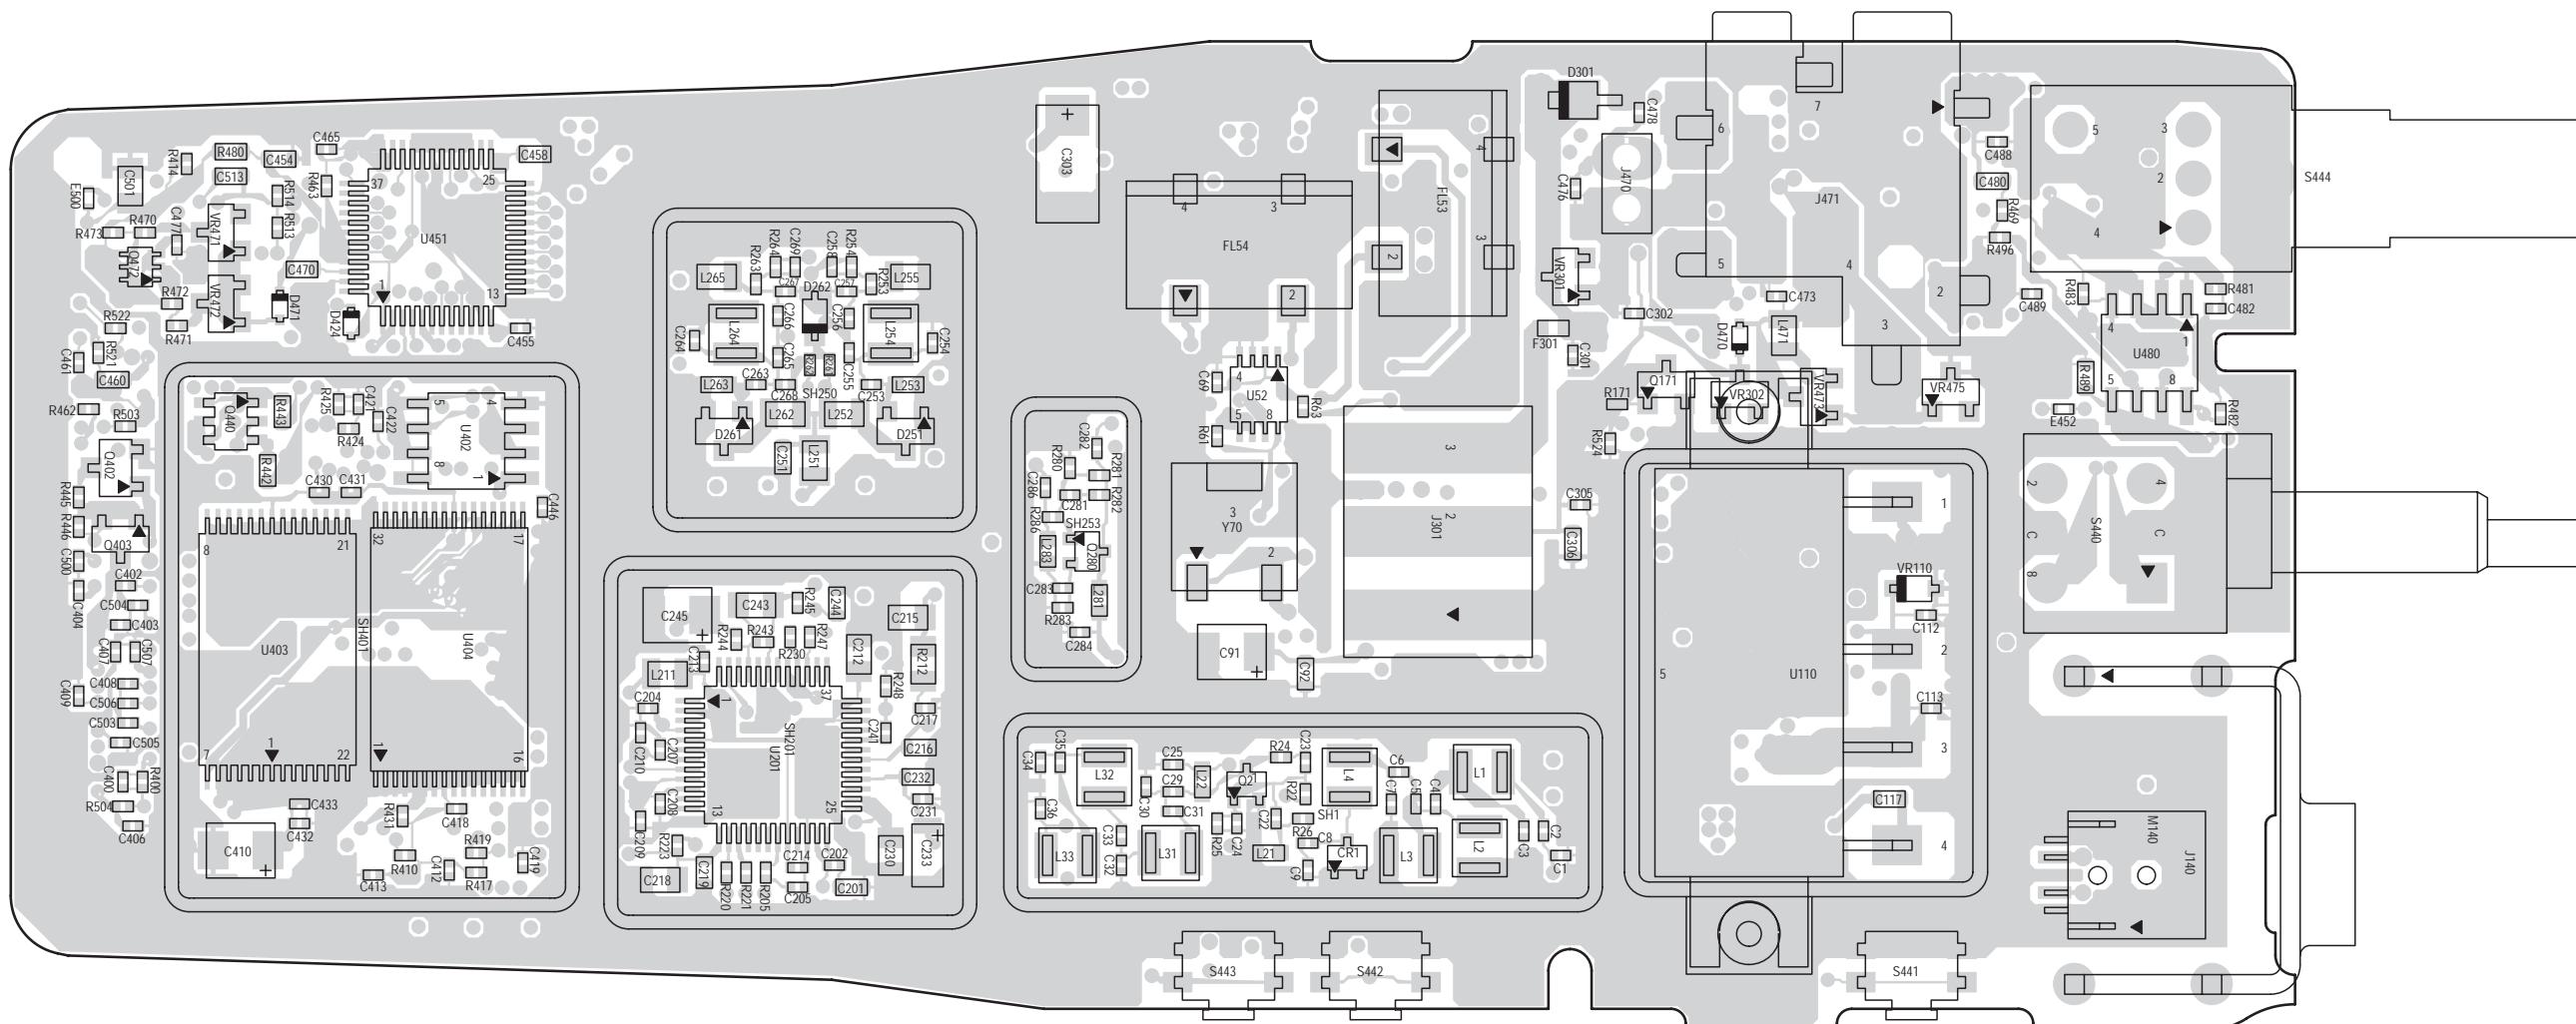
VHF (146-174 MHz) PCB 8486342Z13-C Board Component Side
